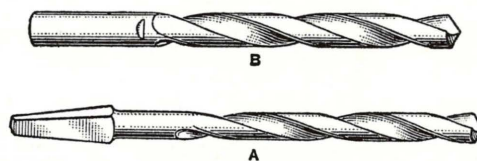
(a) The square shank drill for the brace. (b) The round shank drill for the hand drill
